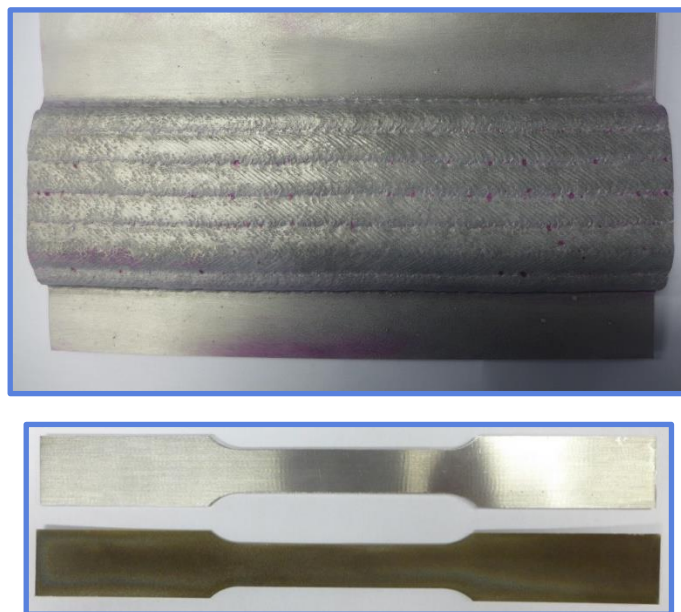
Weld Test Record HS188 bar samples
